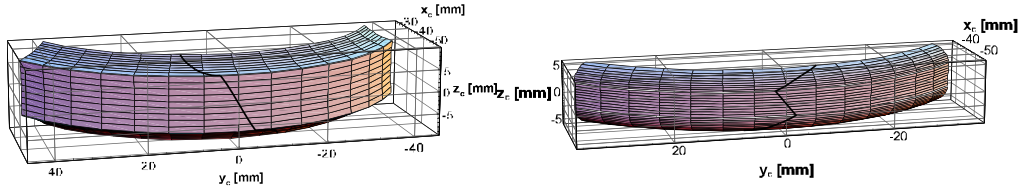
Contact lines on the tool for the central rotor screw (left) and for the idler rotor screw (right).
